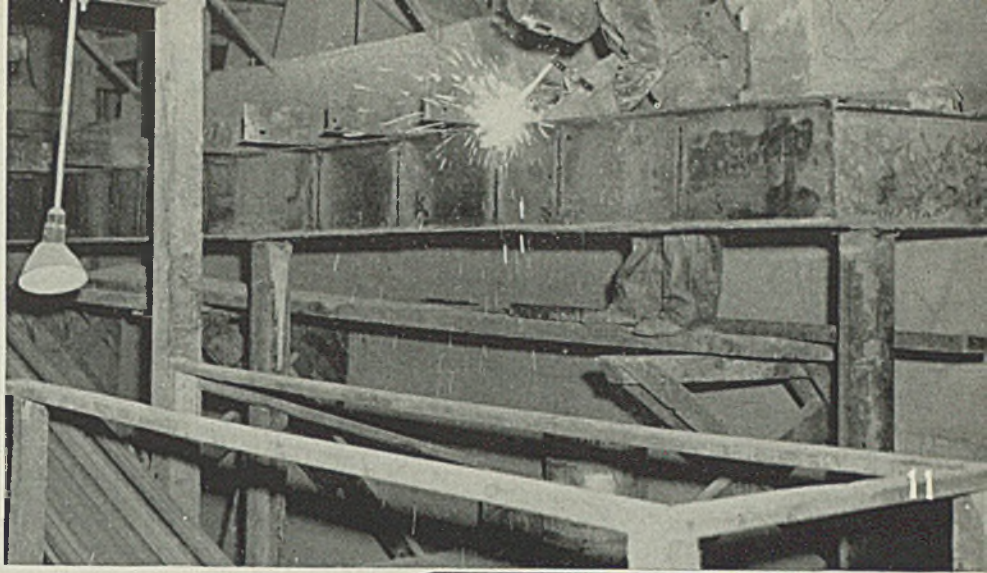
This all-welded pulverized-coal collector and blower was just being fabricated when photographed. It will work in conjunction with five coal pulverizers, blowing the coal particles through a system of 6-inch pipe line to eight roasting ovens. It is welded from 1/4-inch thick plate and pipe—all from the scrap pile
